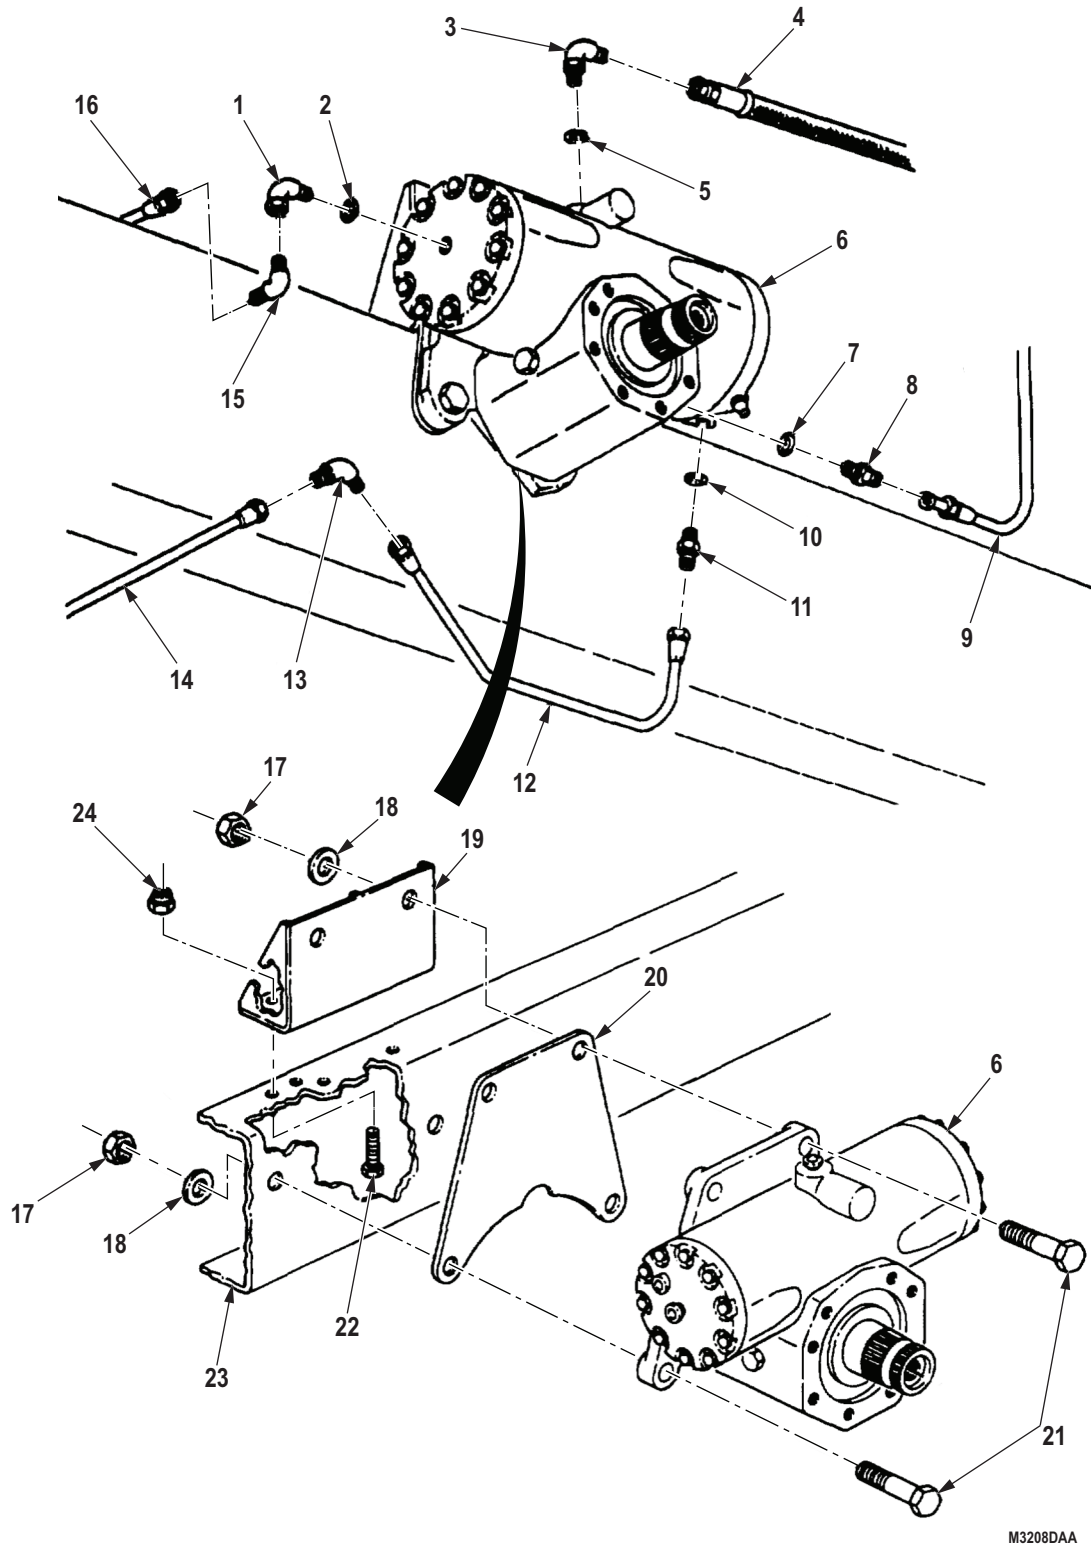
Steering Gear (Sheppard) and Mounting Bracket Installation (M939A2).
